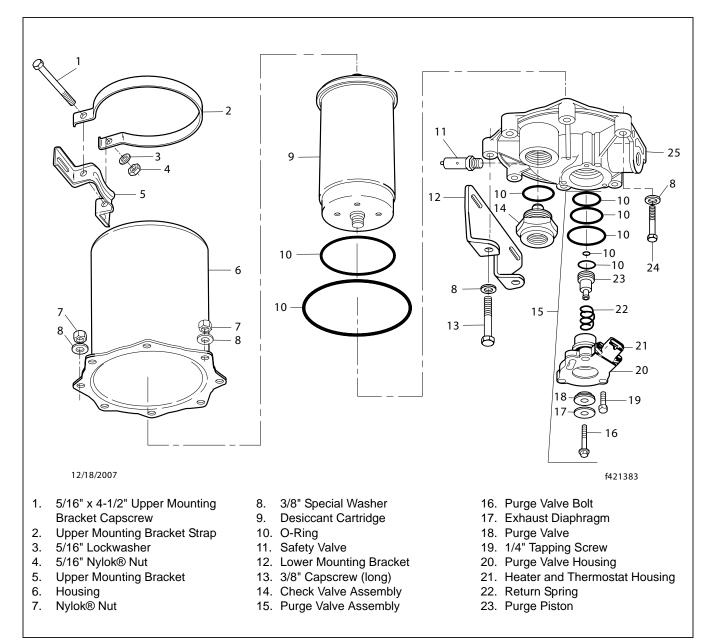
Air Dryer (exploded view of Bendix AD-9 shown)
